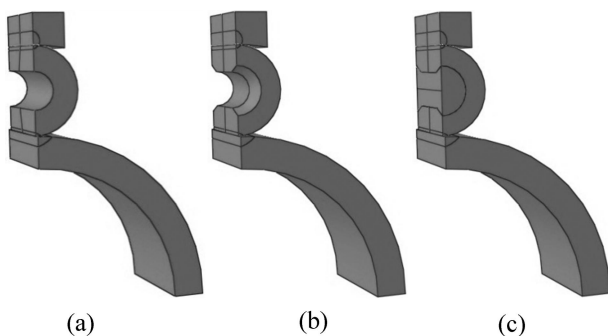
Finite element analysis model of three types of bearings: (a) Hollow cylindrical rolling bearing; (b) Deep hole hollow cylindrical roller bearing; (c) Elastic composite cylindrical rolling bearing
